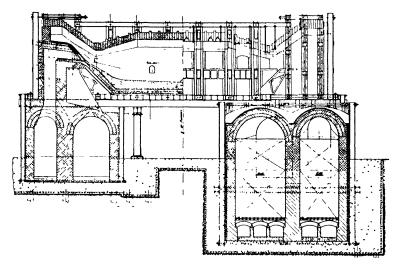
A 90-ton fixed open-hearth furnace (By courtesy of the Iron and Steel Institute)
